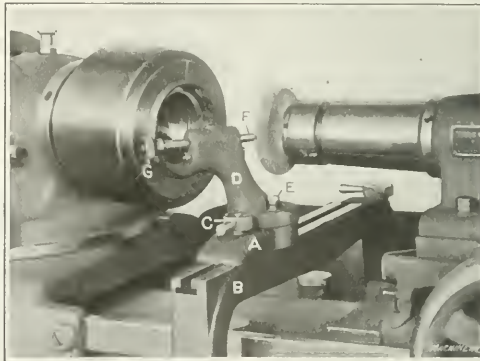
Radius Wheel Truing Device for Use on Heald Internal Grinding Machines
